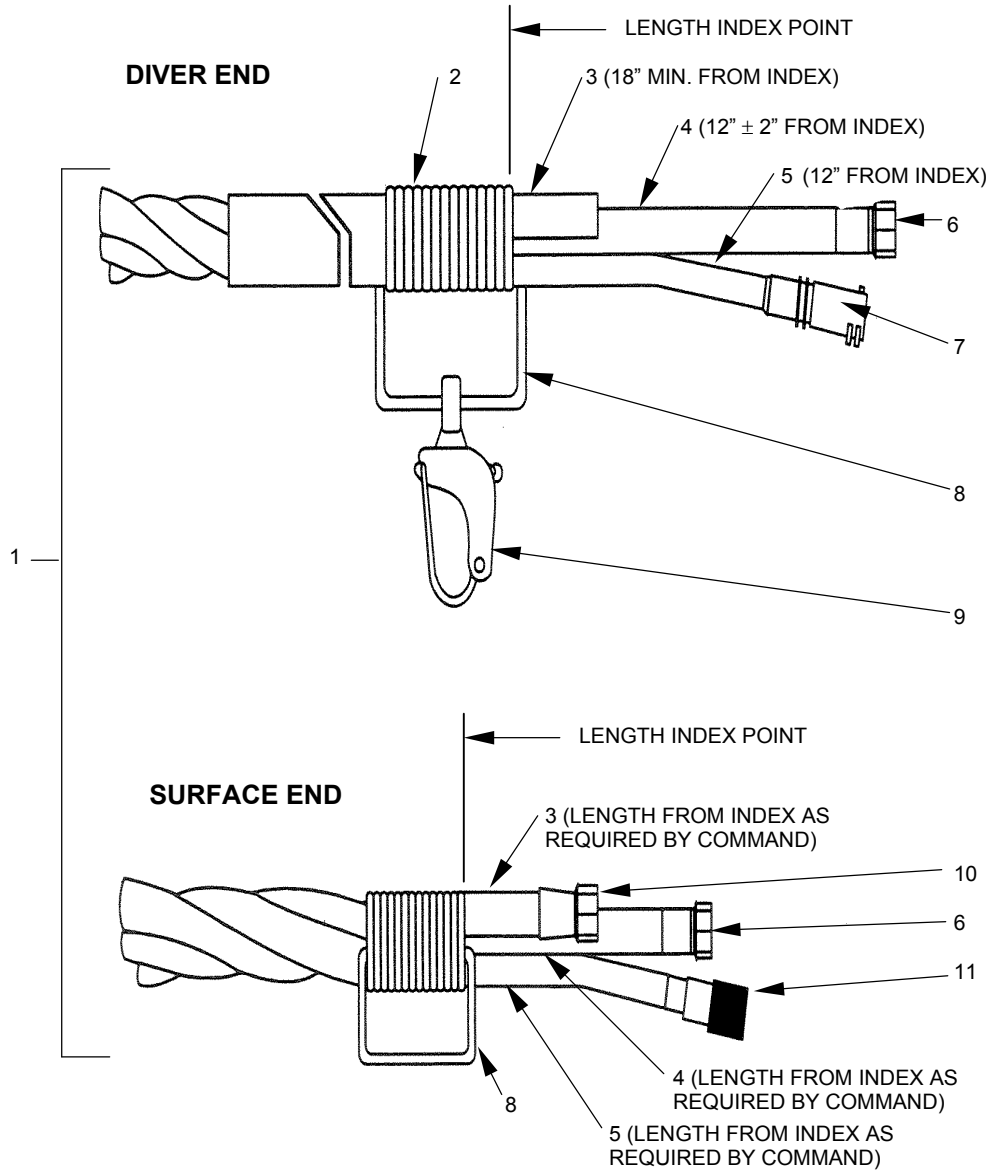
Mk 20 3-Part Spiral-Wound Umbilical Assembly (Amron)
